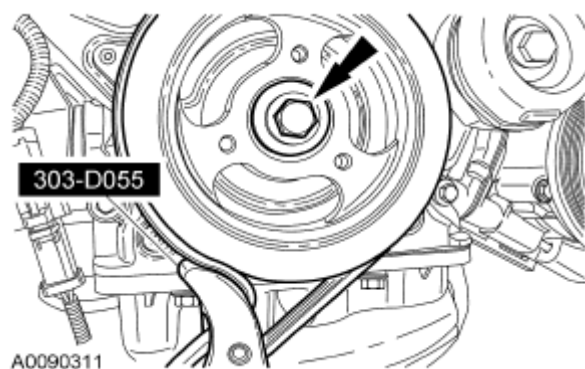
Locating Special Tool (303-D055) And Crankshaft Pulley Bolt
